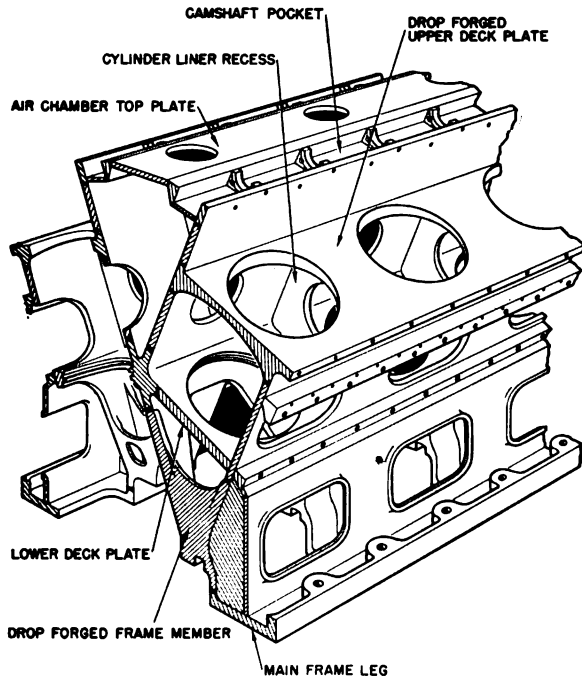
Sectional sketch of Winton welded frame.
